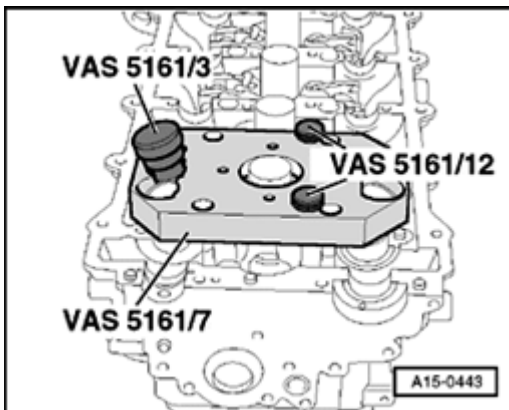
Placing Guide Plate VAS 5161/7 From Valve Cotter Disassembly And Assembly Device VAS 5161 On Cylinder Head
